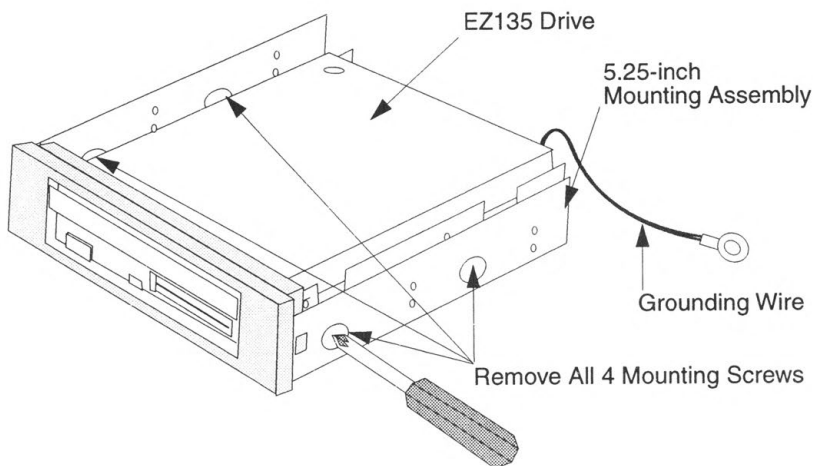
Remove the EZ135 Drive from the Mounting Assembly (3.5-inch Bays Only)
